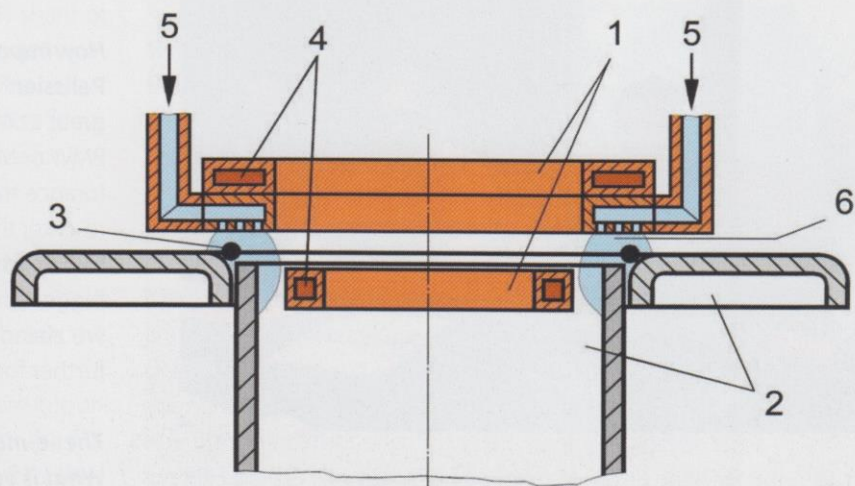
Brazing arrangement for the high-temperature brazing of the joint between a pipe and a flange; (1) outer field inductor, (2) brazing workpieces, (3) brazing alloy application, (4) inductor cooling, (5) shielding gas supply lines, (6) shielding gas outlet.
